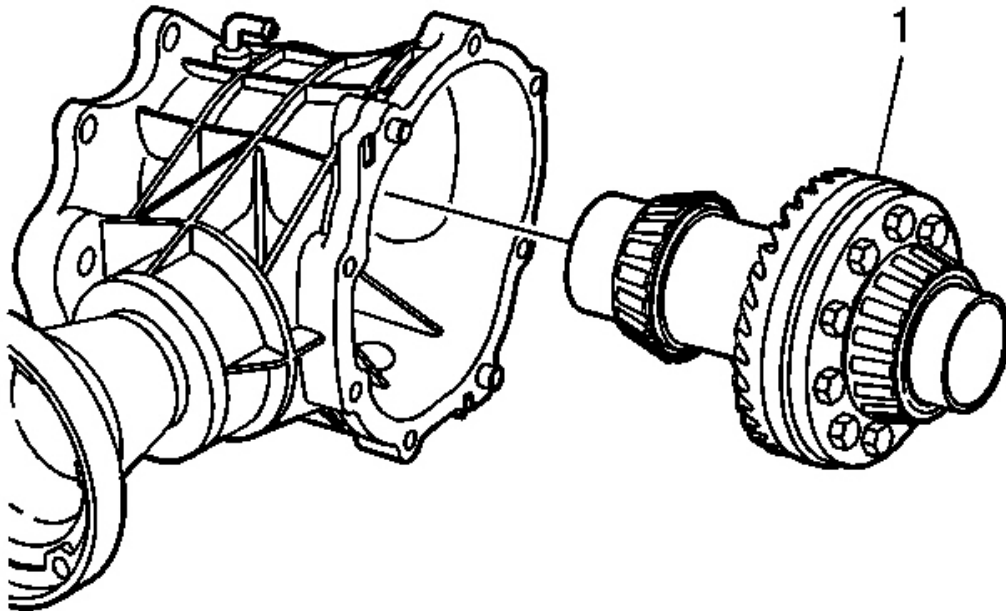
Removing/Installing Carrier Assembly From The Housing
